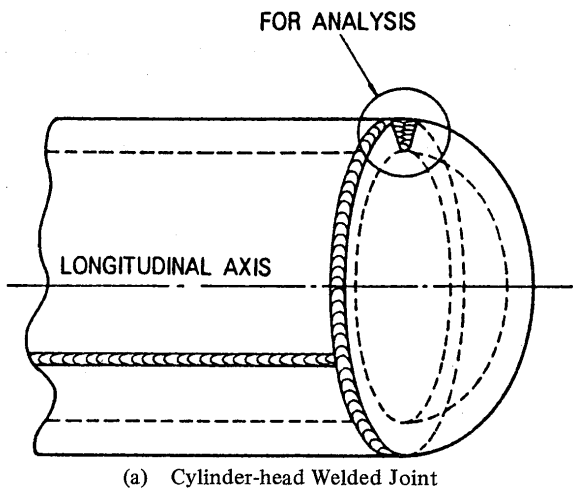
Cylinder-head Welded Joint of a Pressure Vessel and Its Research Model.
